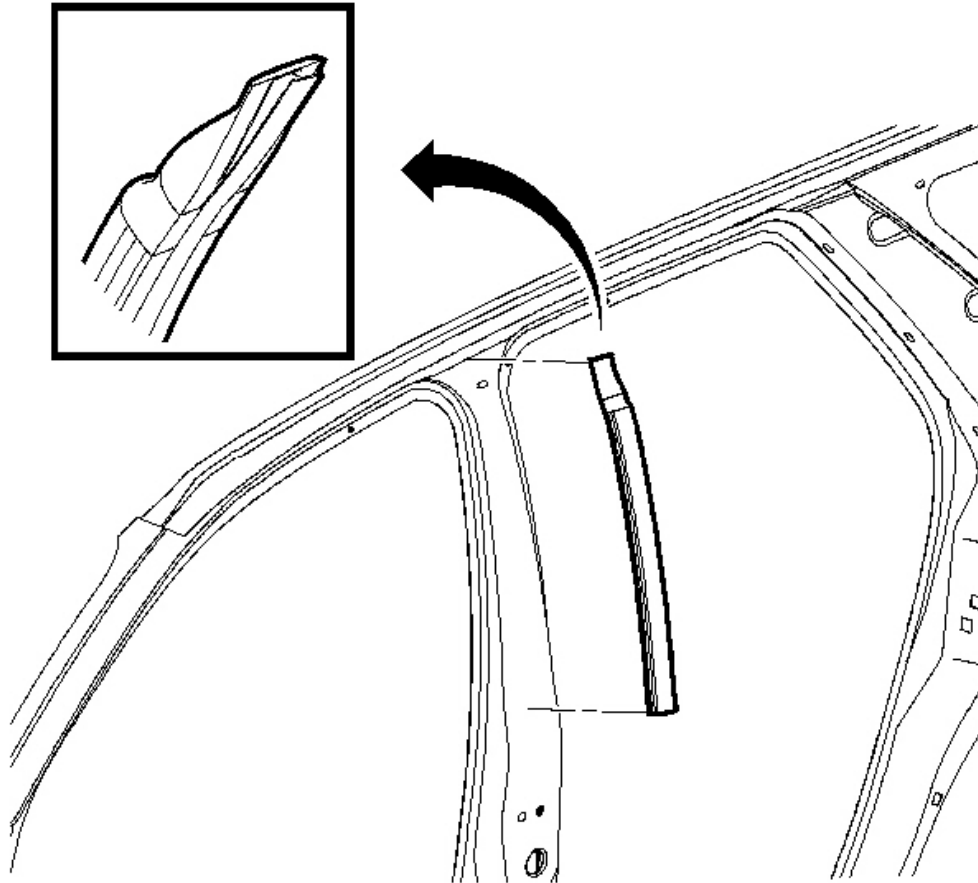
View Of Center Pillar Auxiliary Weatherstrip
